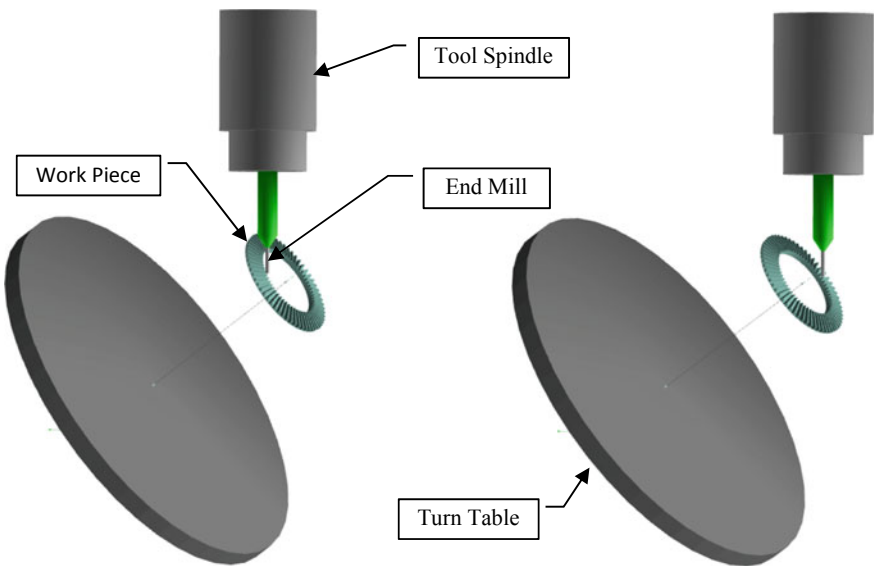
Tip chamfering of a large pitch cone angle bevel gear—EM tool side is used
